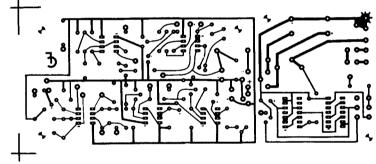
FOIL PATTERN for the printed-circuit board used in making the cardiotach. The board may be cut in two and the pieces wired separately. Pattern is shown half-size.
